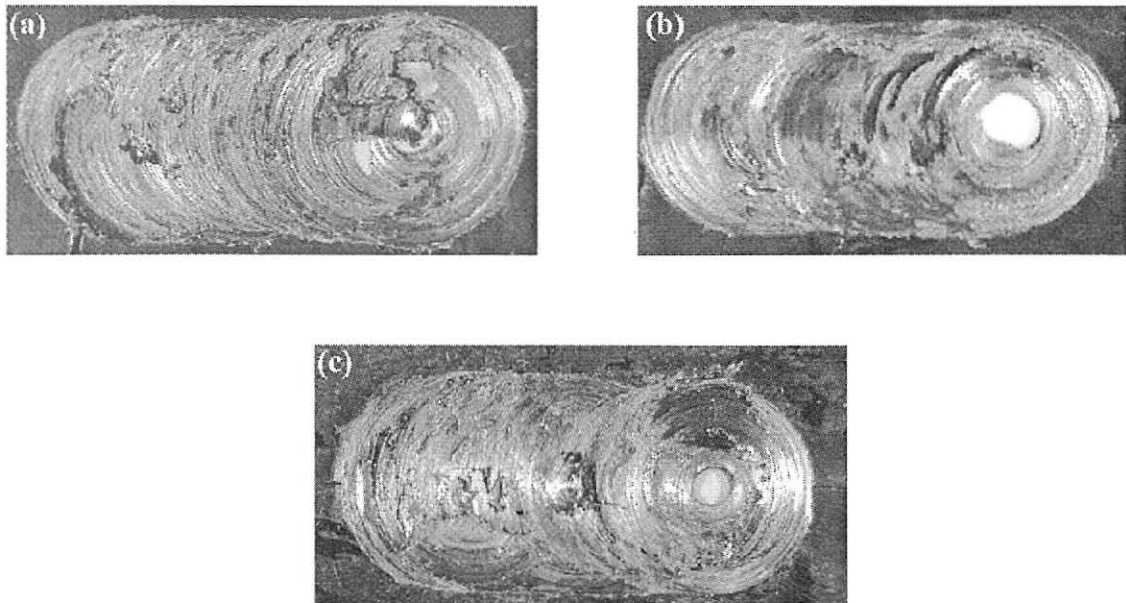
Appearance of the friction stir welded specimens: (a) 250rpm, 100mm/min, (b) 300rpm, 120mm/min, (c) 350rpm, 140mm/min.
